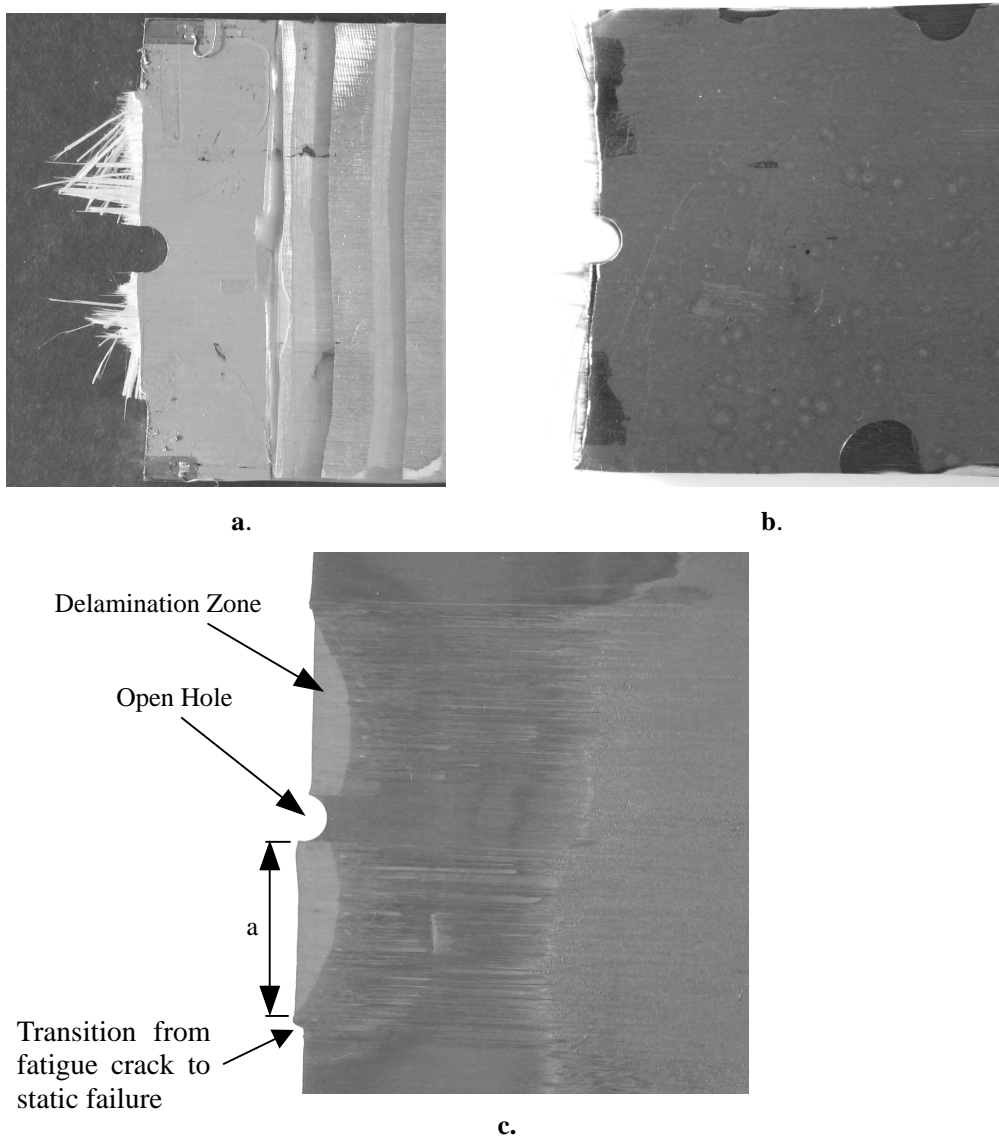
MOHTB specimen destructive inspection. Following fatigue tests, the specimens were pulled apart (a) to expose the crack surfaces. The specimens were then heated to burn away the adhesive in the laminate (b). This allowed the aluminum plies to be separated and inspected (c).
